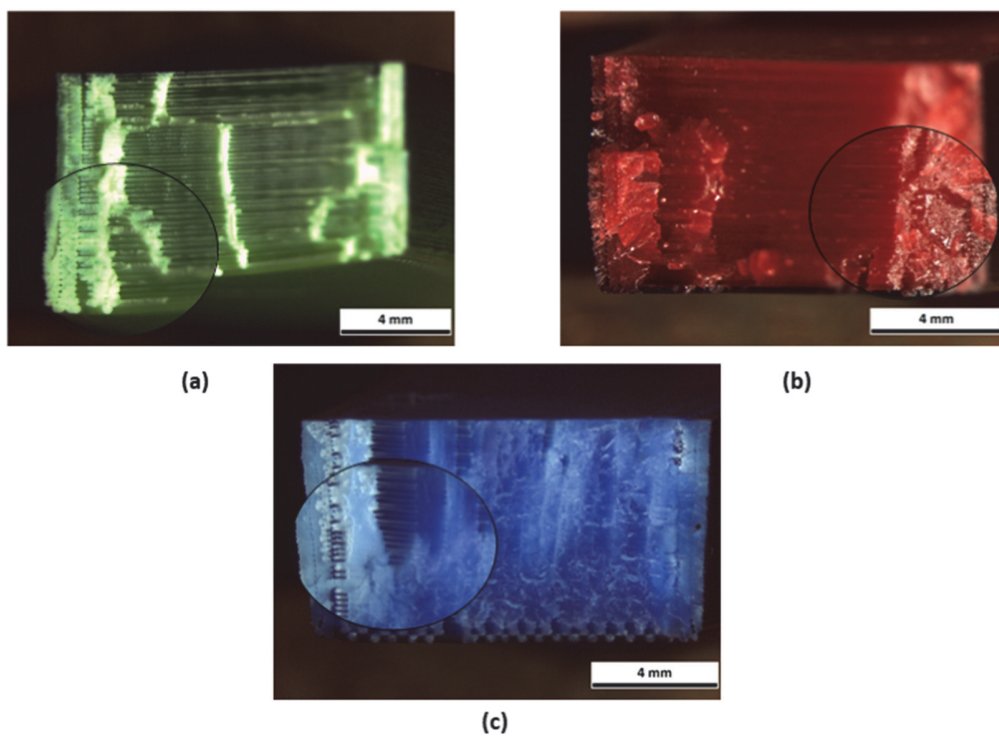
Fracture surfaces of raster angle 45° orientation specimens: a) ABS; b) PETG; c) PLA.
